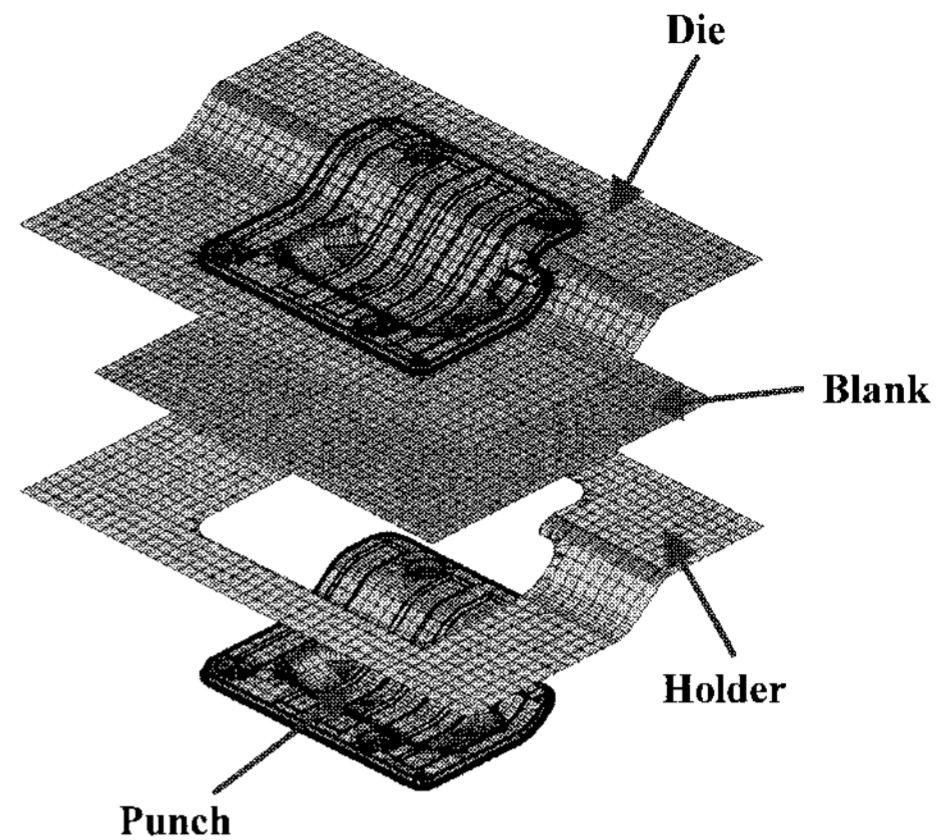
Initial setting of tools and the blank for the stamping analysis of the heat protector panel
